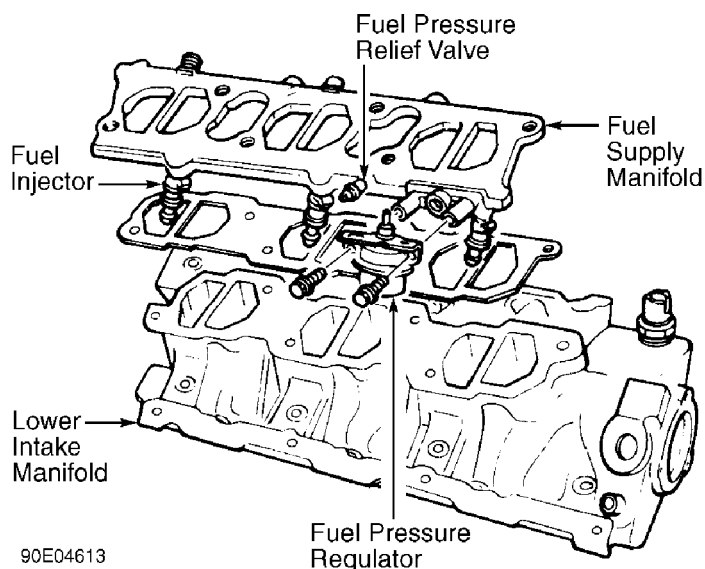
Exploded View Of Fuel Supply Manifold Assembly (Navajo)
